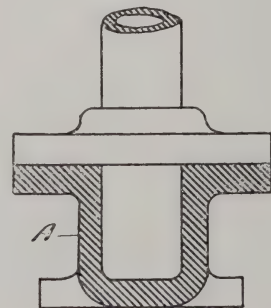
END VIEW OF VALVE-CHEST OF SAME.
